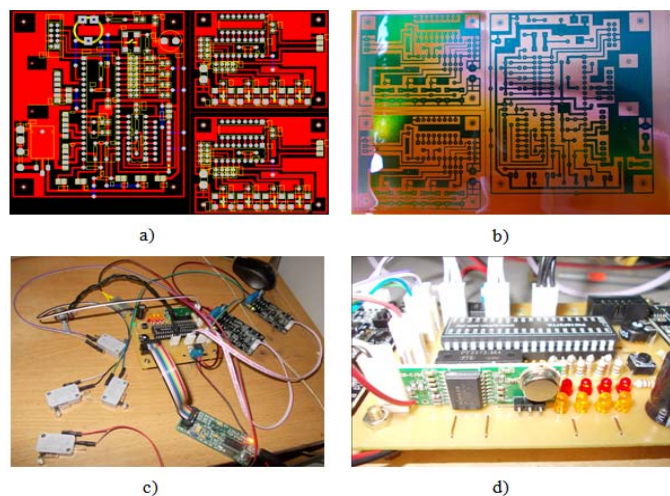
a) Circuit layout, b) Etching Process, c) Assemble Process, d) Complete Controller product
